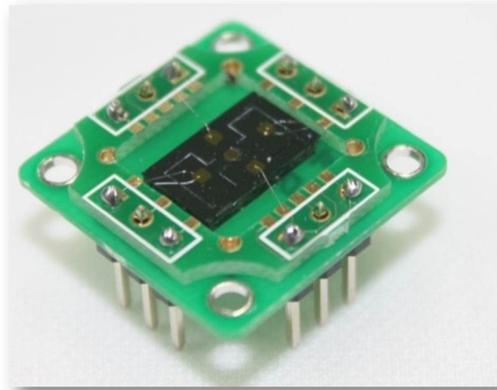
Silicon nitride scanner wire-bonded to printed circuit board (PCB)
